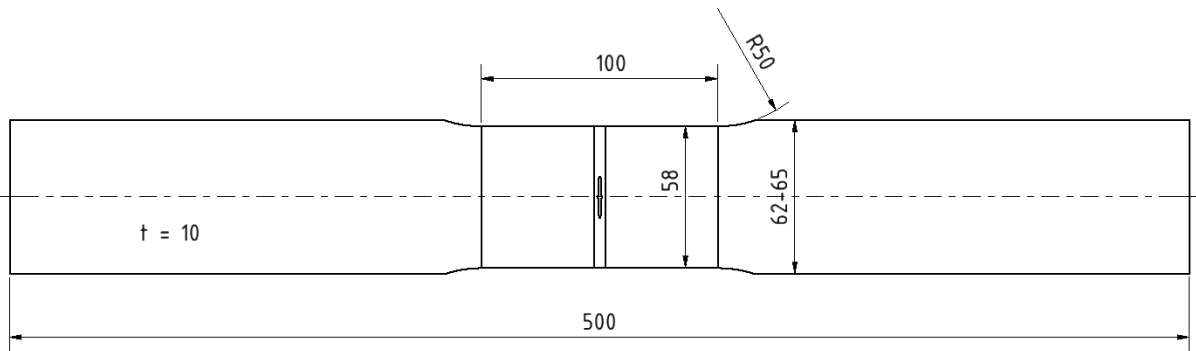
Design of the welded specimen with welded joint.
